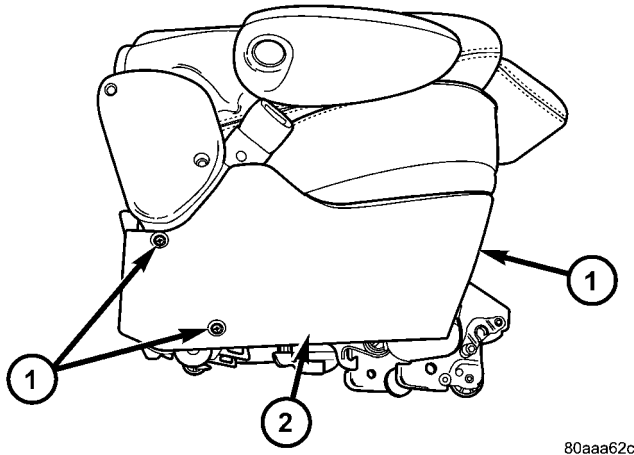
SEAT SIDE COVER - QUAD BUCKETS
